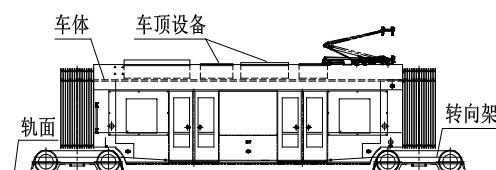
Schematic diagram of roof equipment layout for low floor vehicle
